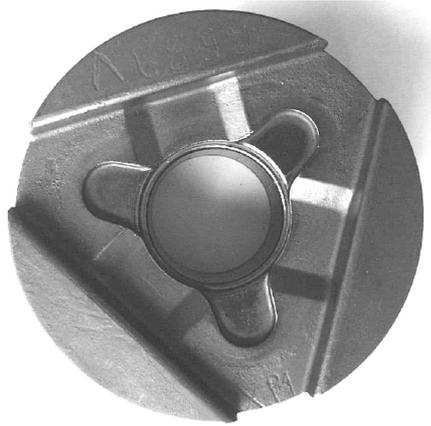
Studied forging die (courtesy of Galladé Umformtechnik, Witten, Germany).
